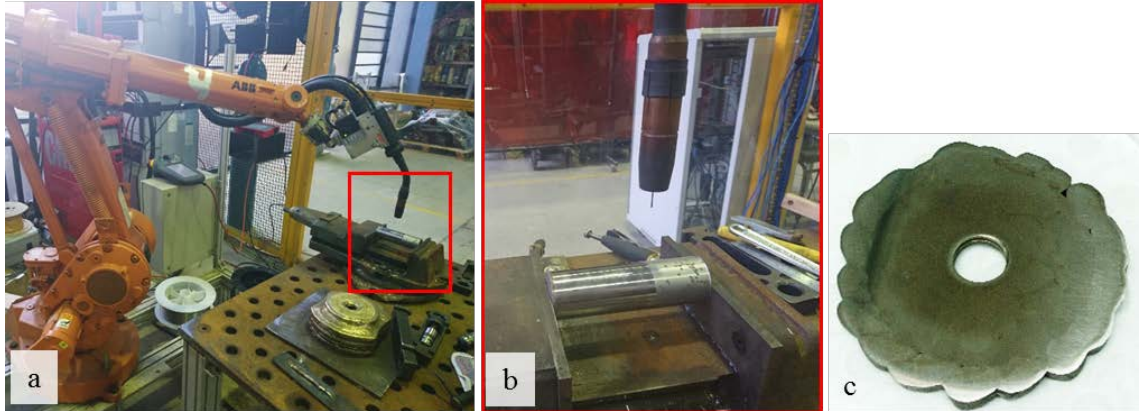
(a and b) wire-arc deposition of Monel K500 wire on the component surface (c) polished and etched cross section of a component with deposited layer without post-machining.
